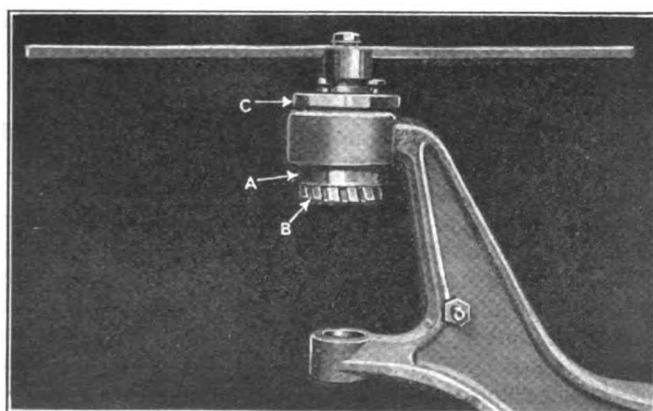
FRONT AXLE BEARING CUP ASSEMBLING. FIG. 4. RIVETING FIXTURE FOR DRIVE GEAR
